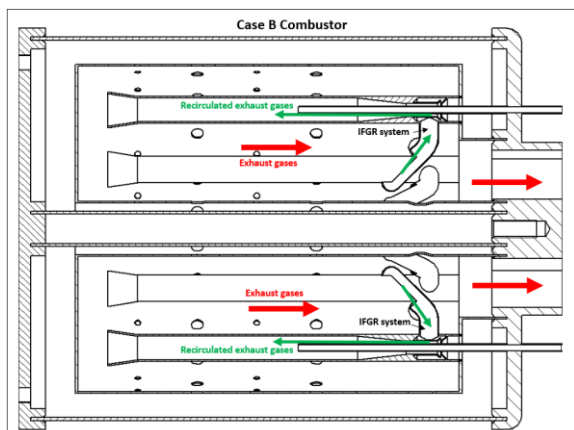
Cross sectional view of 3D model of modified combustor (case B)
